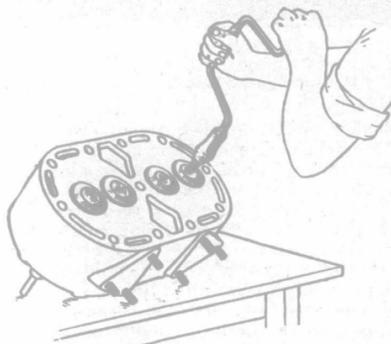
Grinding Valves in Valve-in-head Type of Engine.
